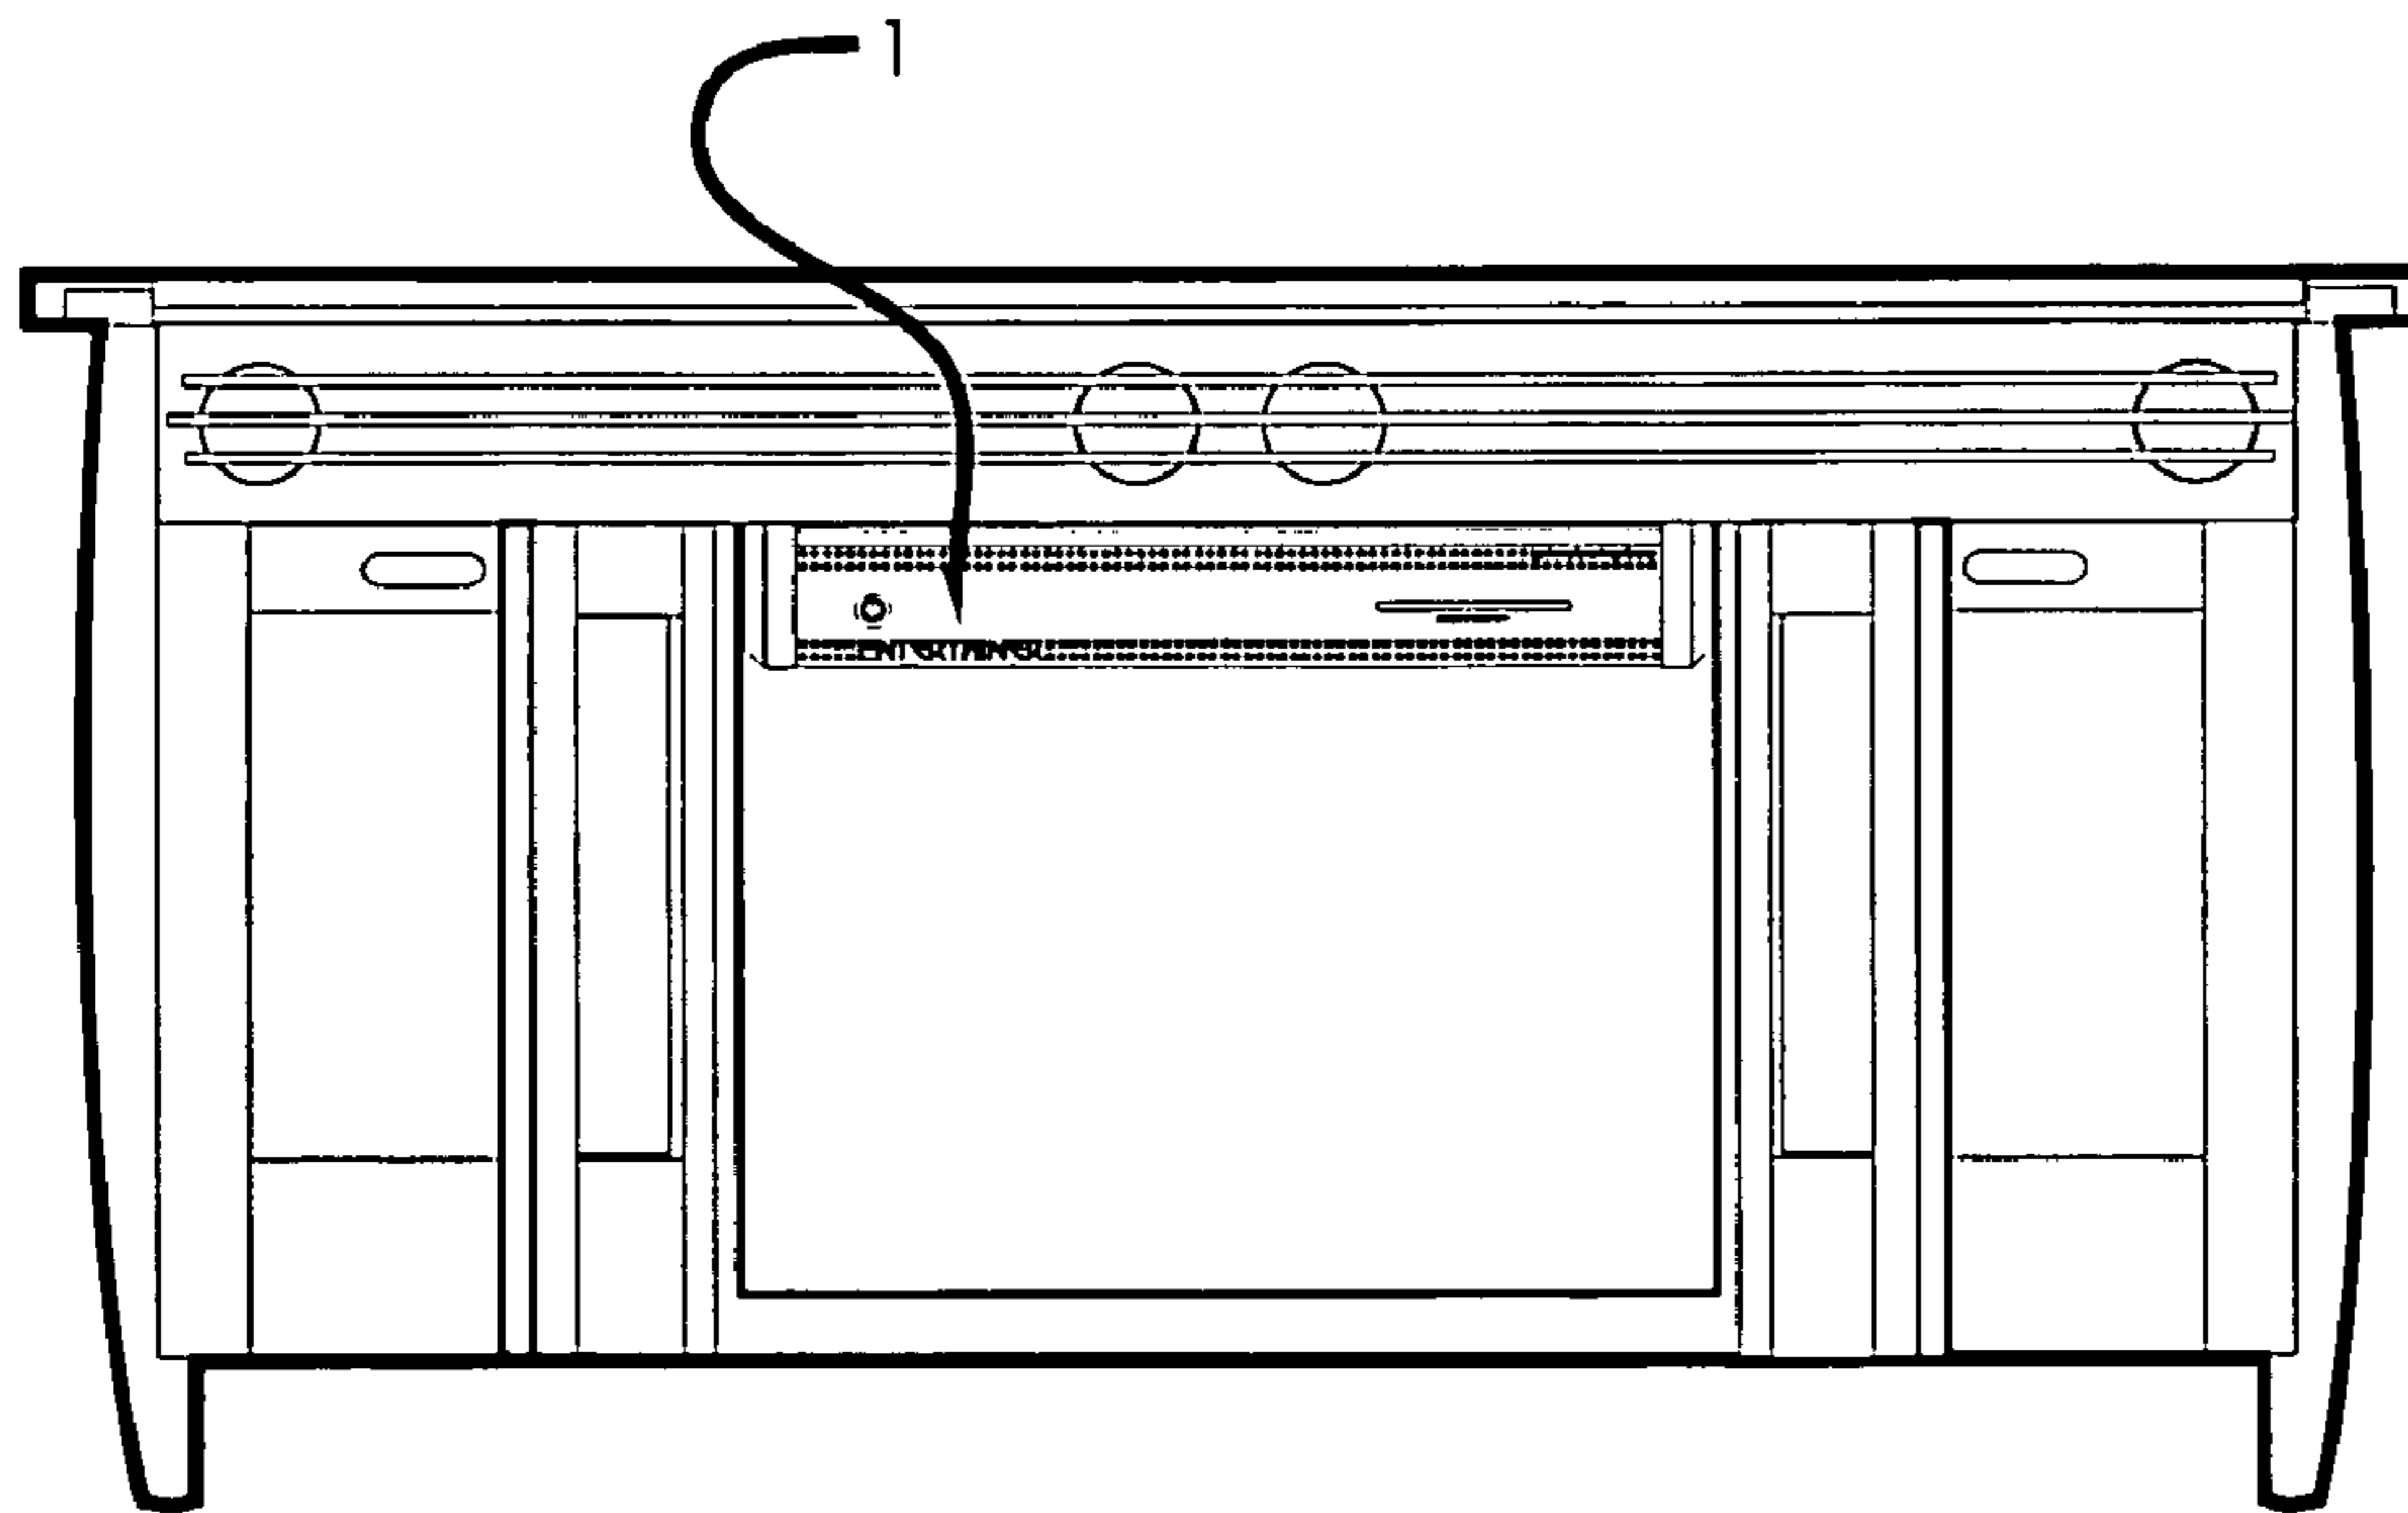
Front elevation of entertainment center furniture with doors open showing alternative embodiment of invention.
